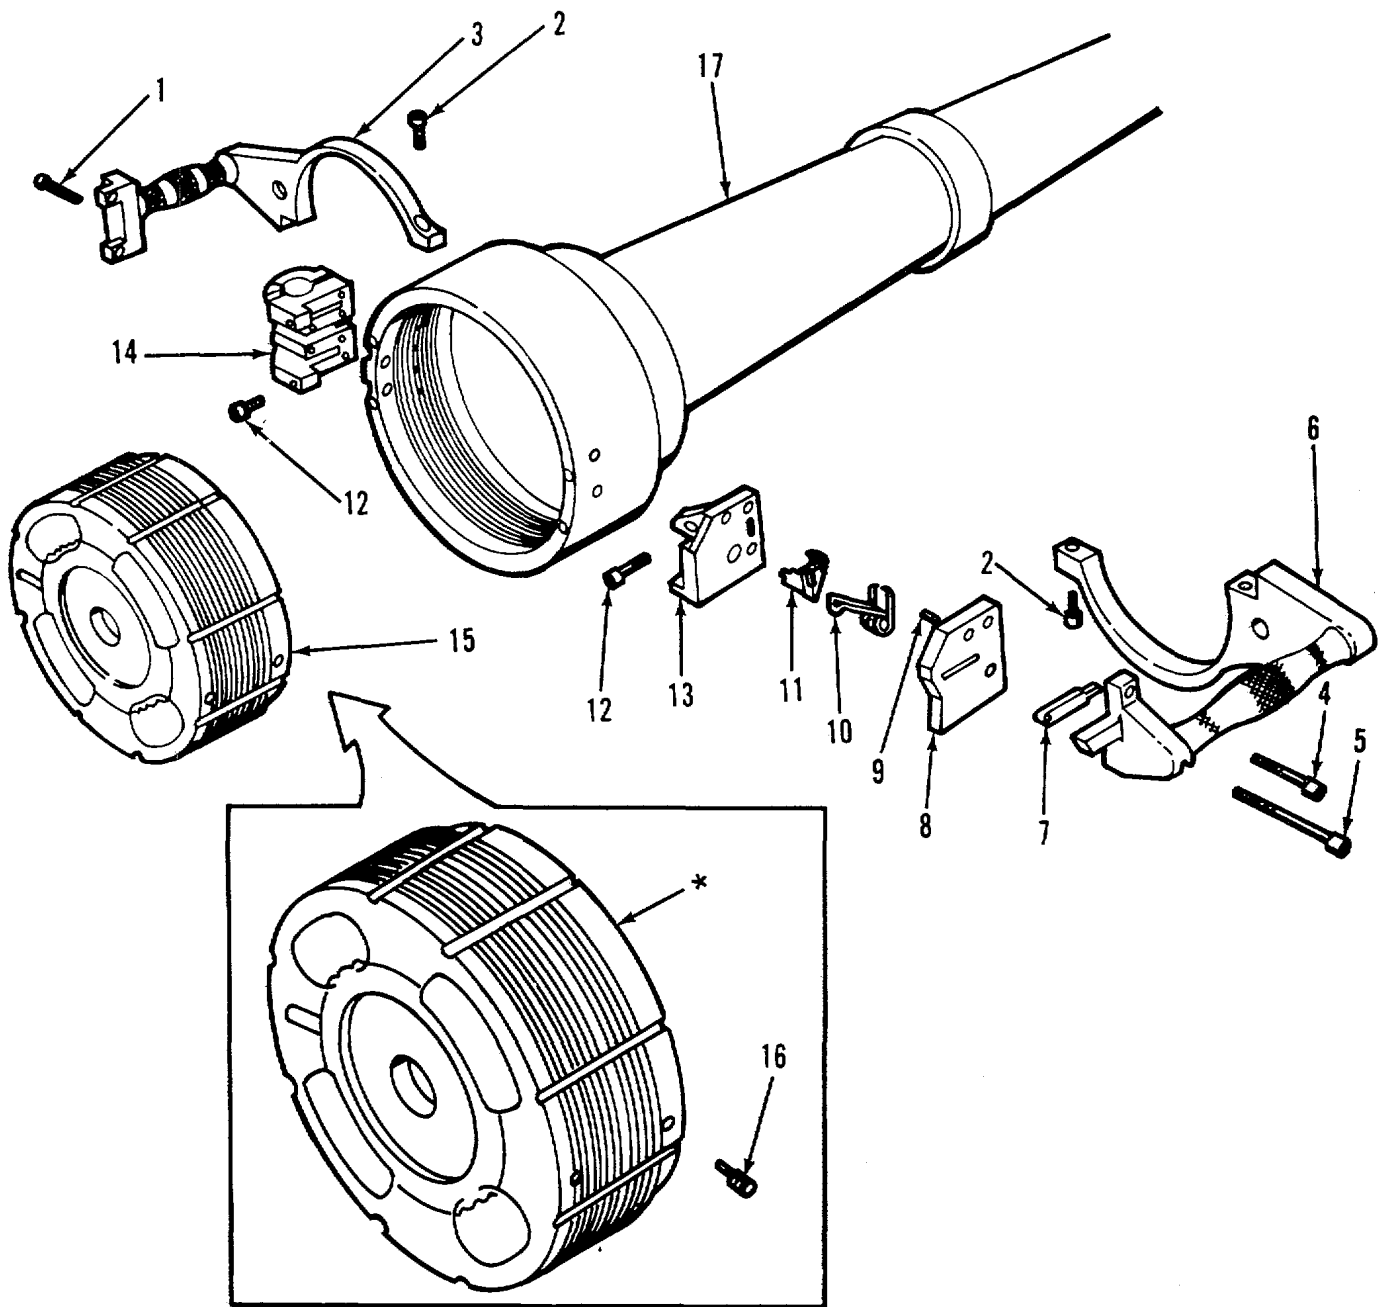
Cannon, 106-mm: M206 and hinge assembly.
